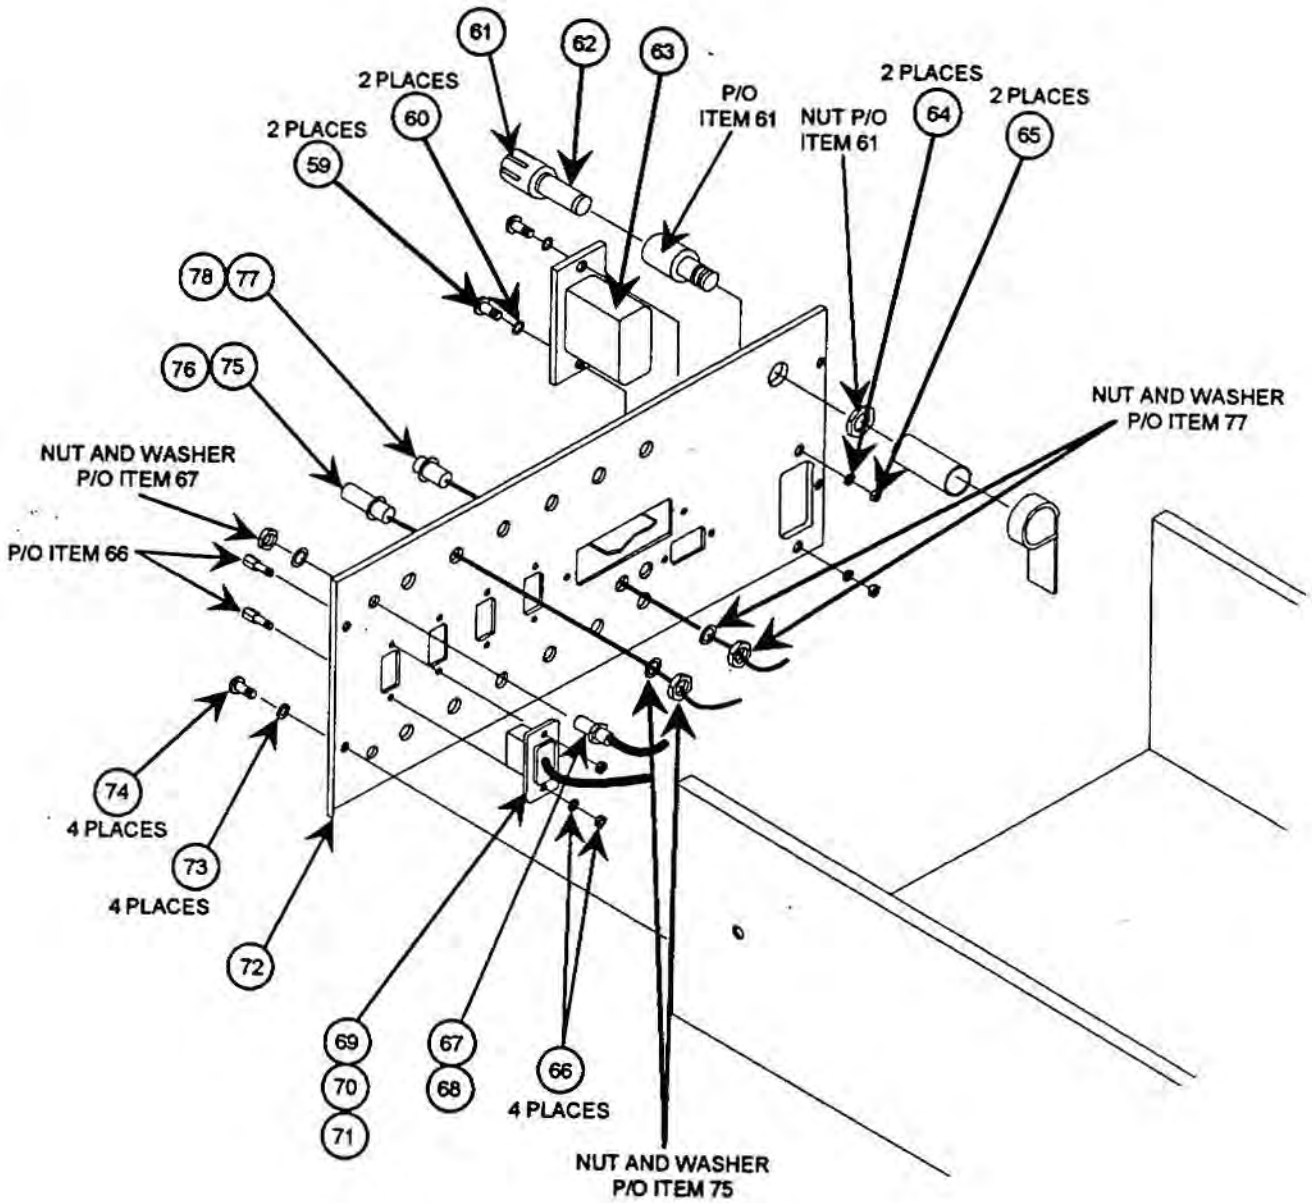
WJ-9902-2 Receiver Controller Assembly Parts Location
